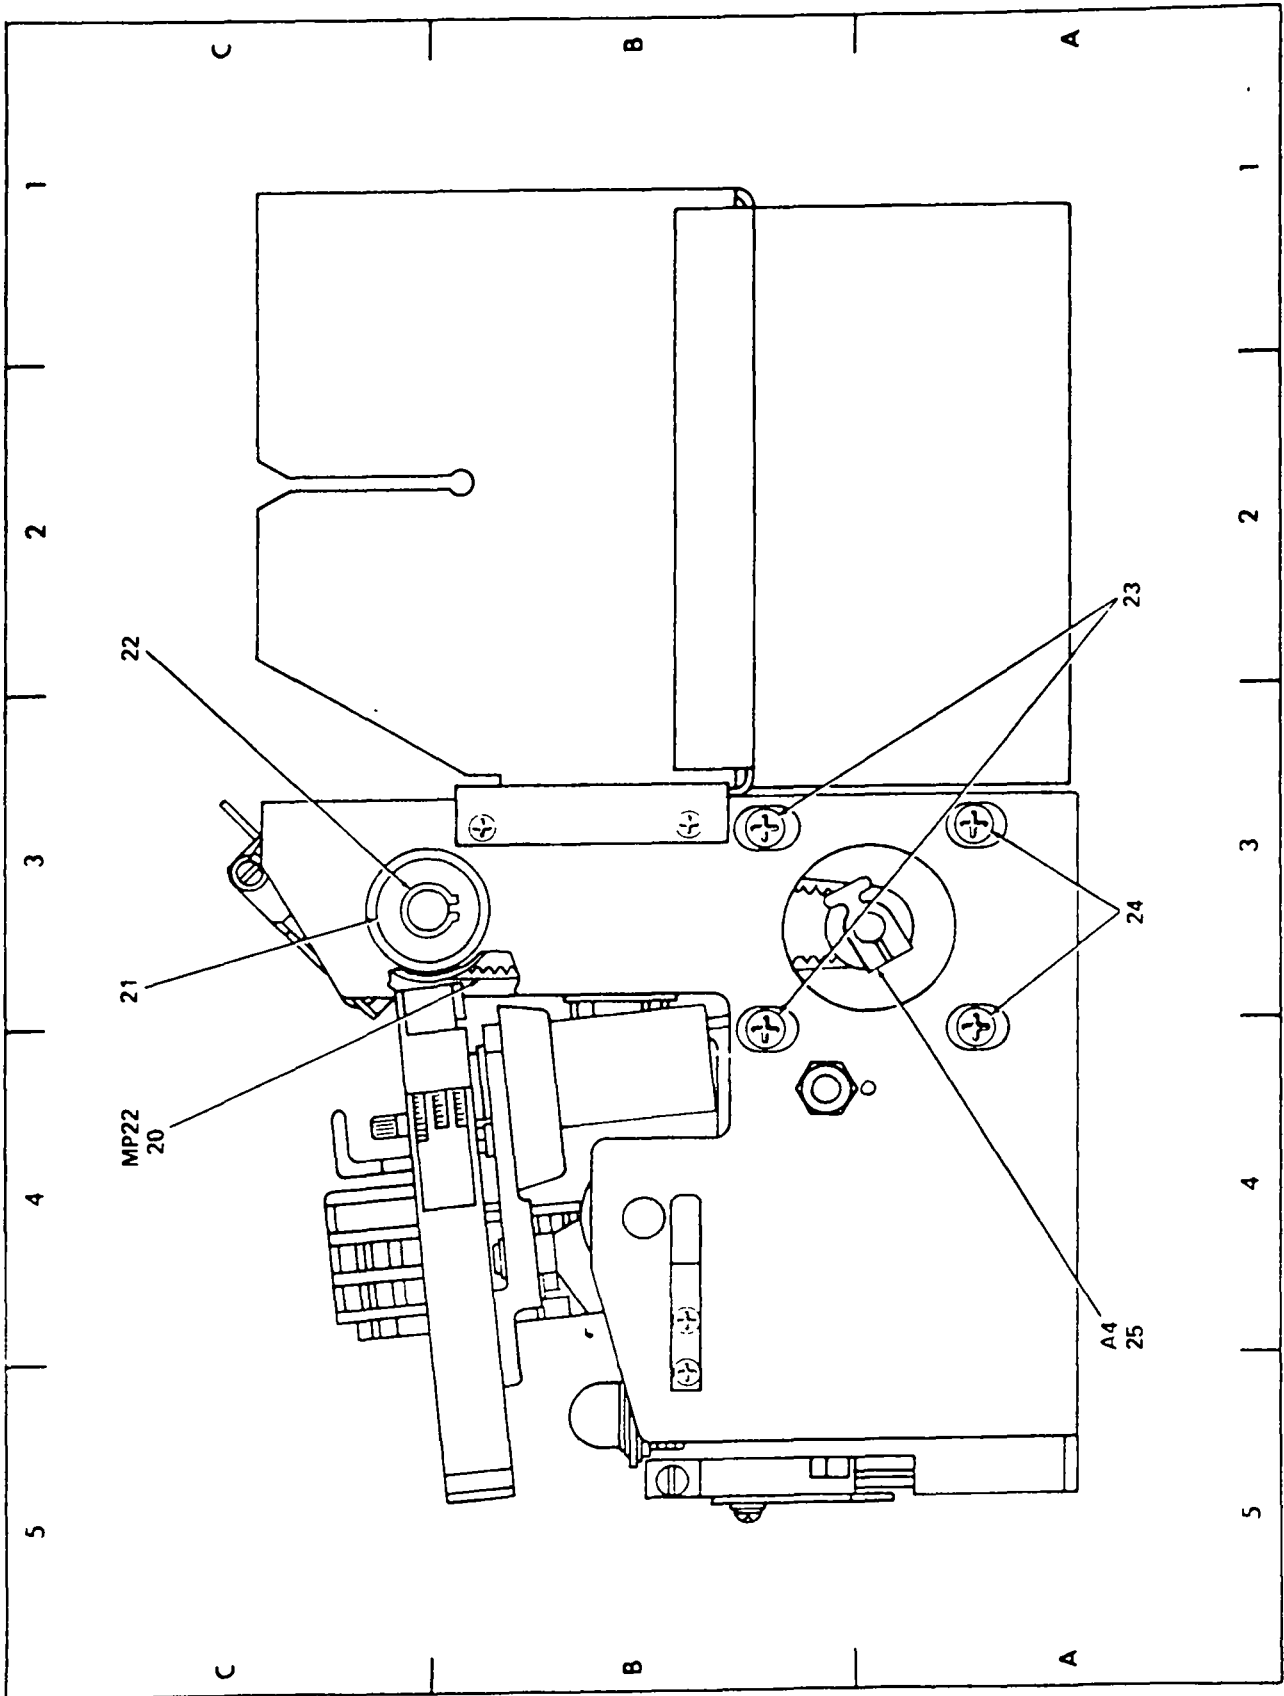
Teleprinter Subassembly (Sheet 4 of 5)
